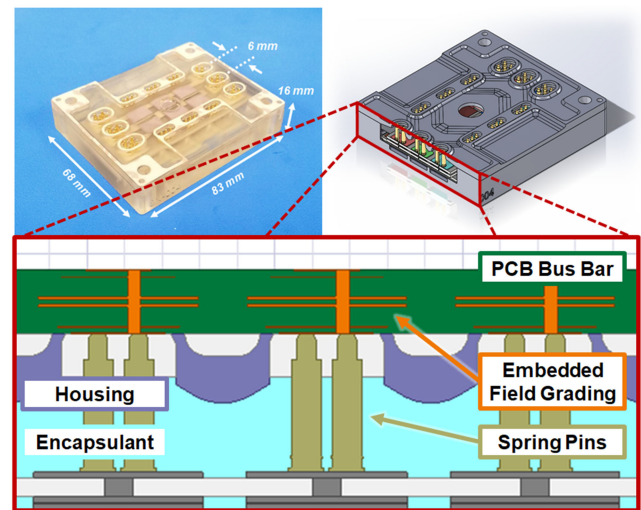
Cross-section of the 10 kV, 80 A SiC MOSFET power module showing the fully enclosed power terminals sealed beneath the housing by the encapsulant and above the housing by the PCB busbar.
